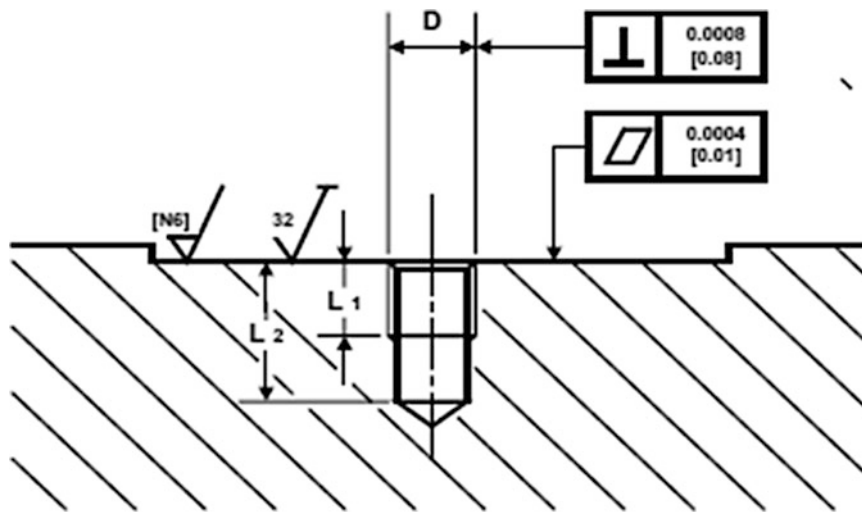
Surface and mounting hole preparation recommendations—L1 and L2 would depend on the stud being used
